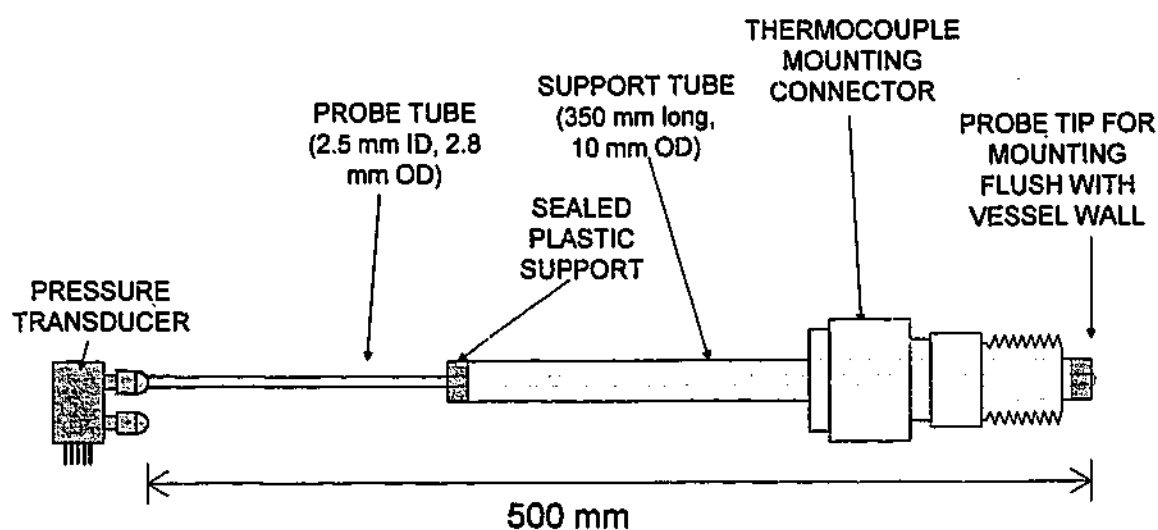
Modification to the probe for use flush with the bed wall in the 146 mm, 300 mm and 600 mm beds. Note that the thermocouple connector could be slid along the probe support tube the required amount so that the end of the probe remained exactly flush with the inside surface of the vessel wall.
